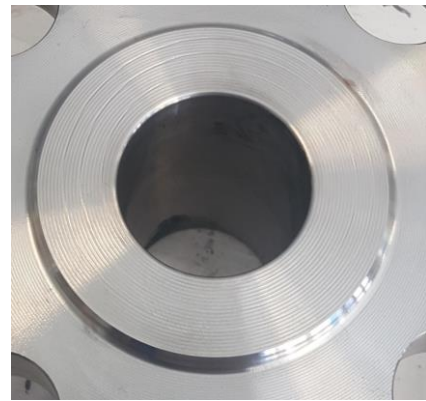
Raised face part of flange surface with machined concentric serrations and 3-ridge DVS interactions
